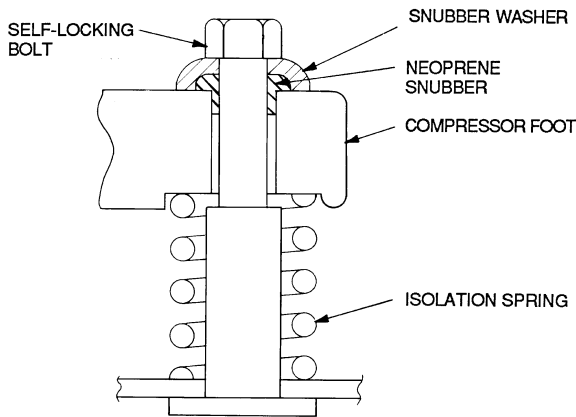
Compressor Mounting (Typical 38AH Unit Shown)
